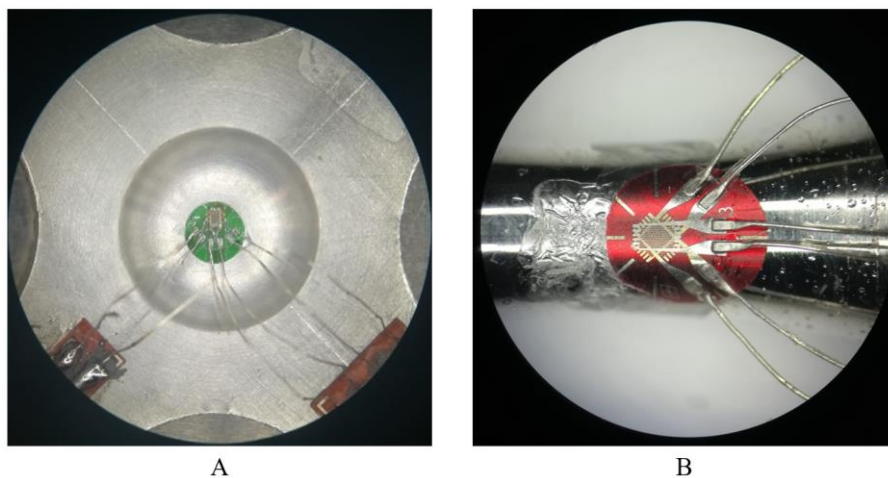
Magnified rosette strain gauges applied to (A) N T-T cruciform; (B) Spc2 tension torsion specimen.
